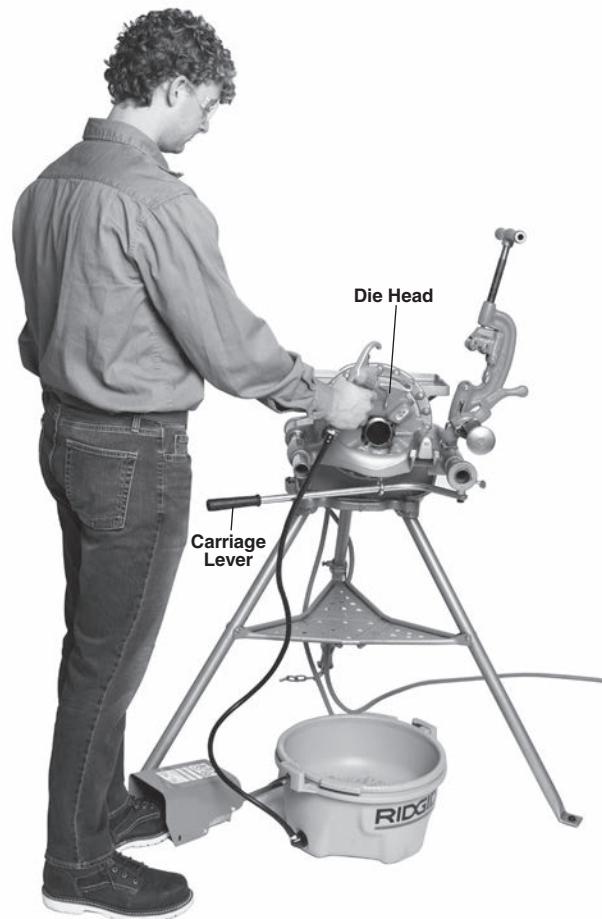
Threading Pipe with Die Heads/Proper Operating Position
